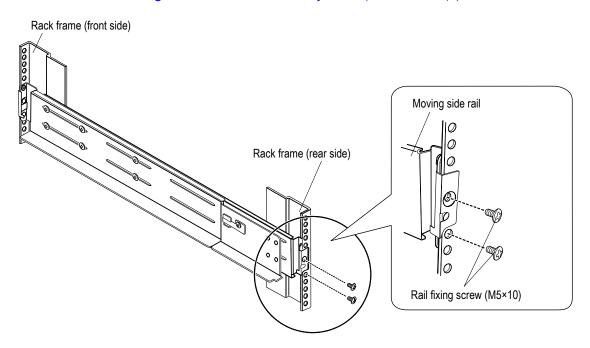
Installing rack rails for Additional Chassis (RKAKS)-3
